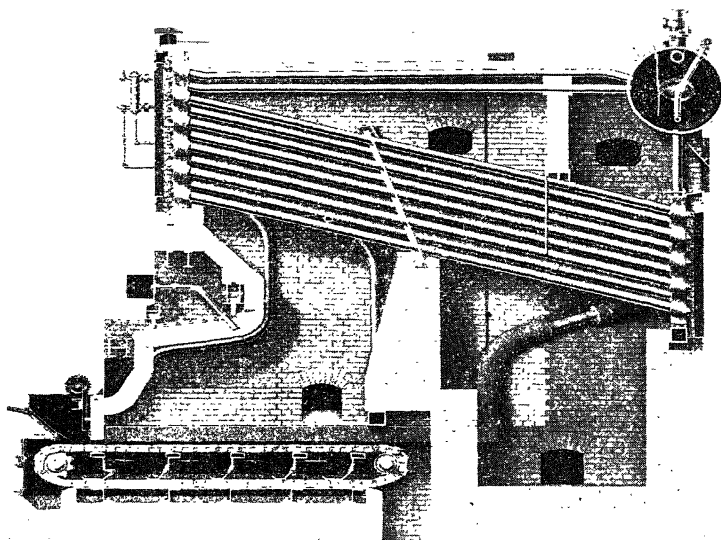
Babcock & Wilcox cross drum boiler with B & W chain-grate stoker.
